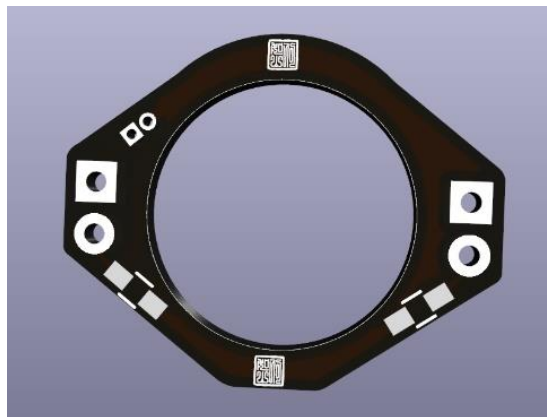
Final design for prototypes with through hole LEDs and SMD resistors.
